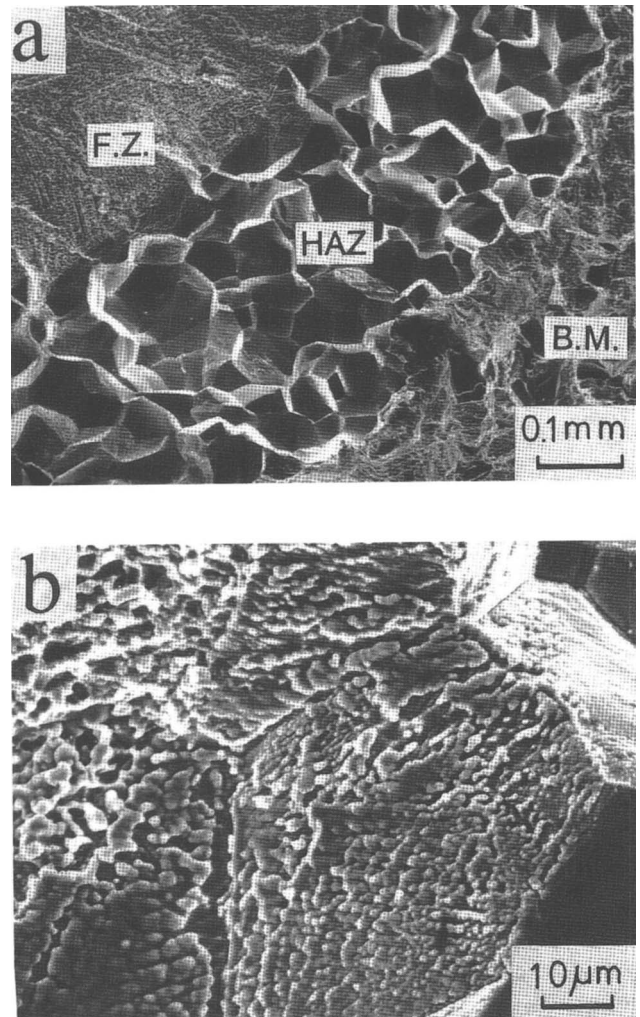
SEM fractographs of the B5-100 weld showing (a) the impact-fractured surface and (b) an enlarged view of the HAZ near the fusion boundary.
